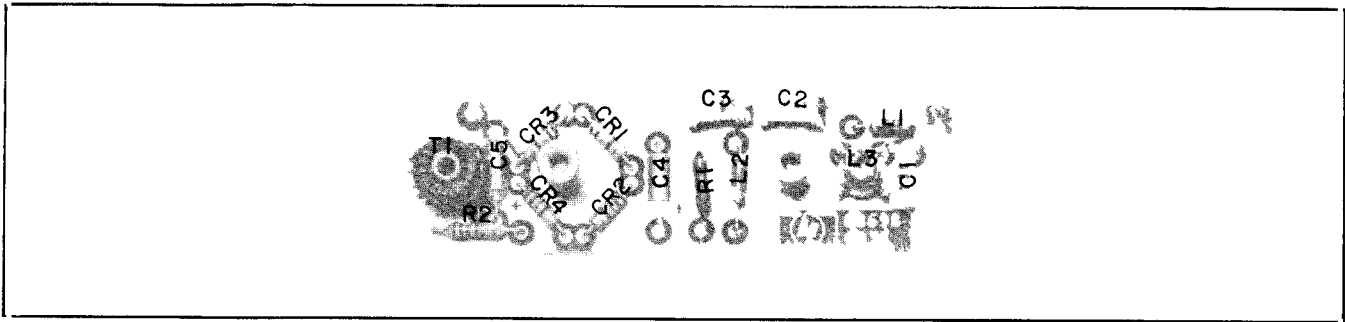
Component Identification, A3A2A1 Mixer Assembly (Part of Change 10)
